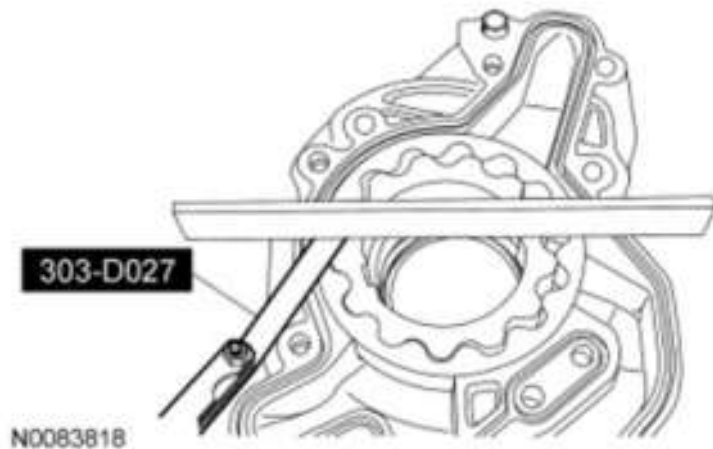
Measuring Height Clearance Between Oil Pump Housing And Inner And Outer Rotors
